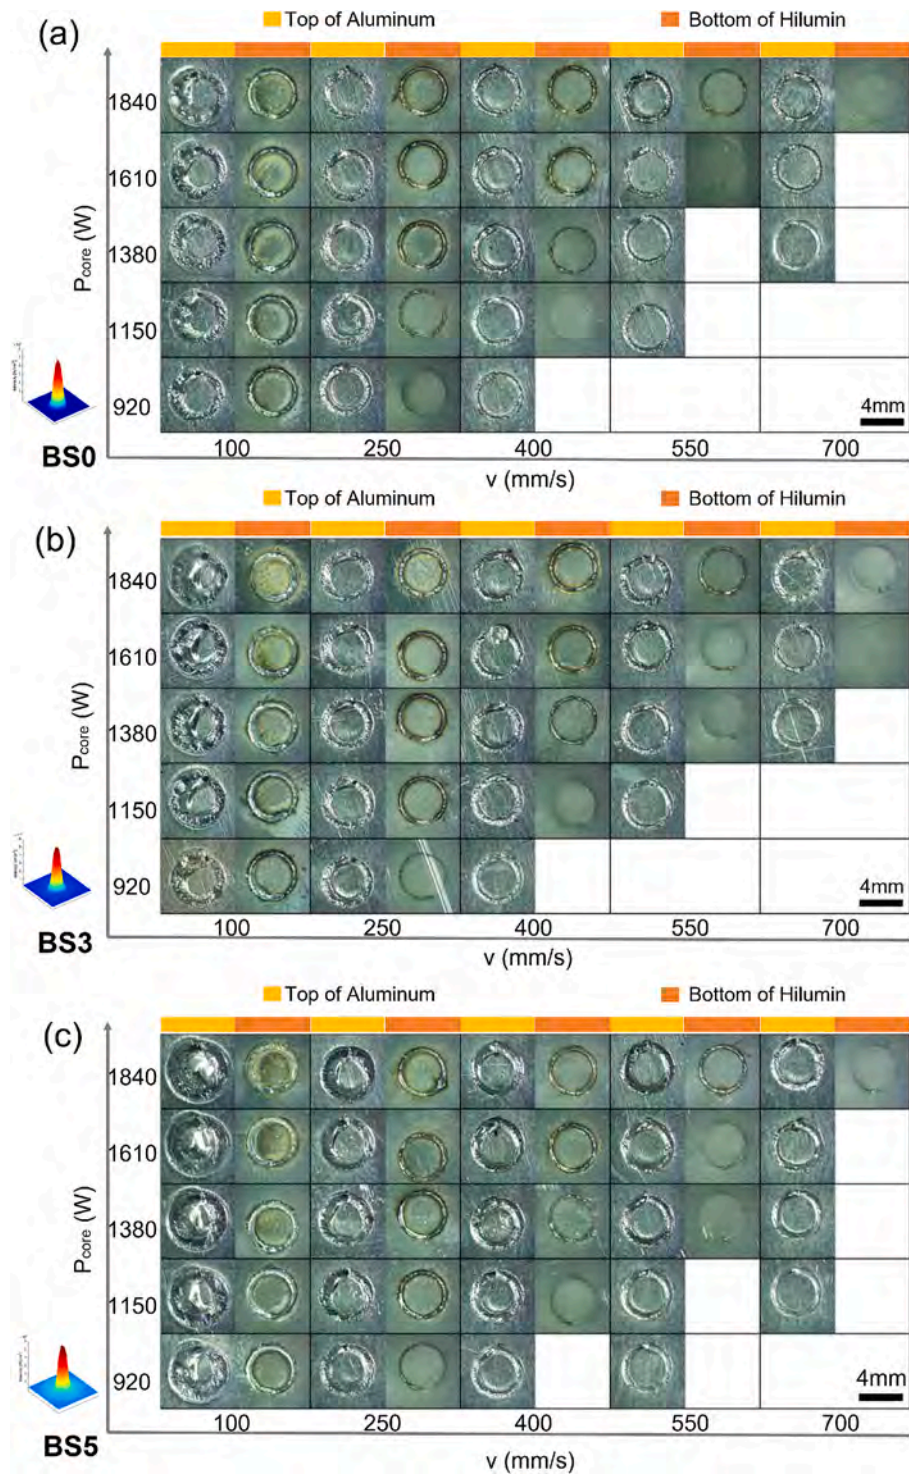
Images of laser welded aluminium /Hilumin joints as a function of core power and weld speed using (a) BS0, (b) BS3, (c) BS5 beam shapes.
